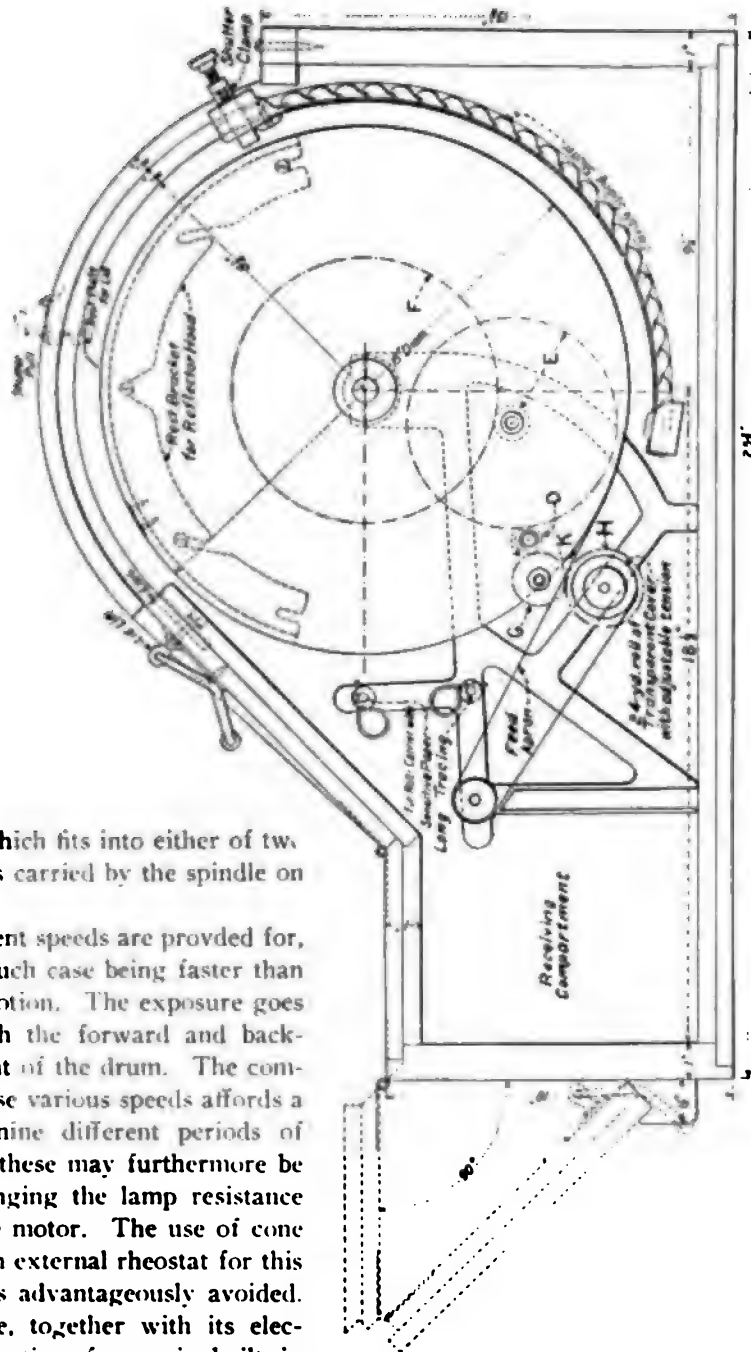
Star Photo-Printing Machine, end view of inside mechanism.
